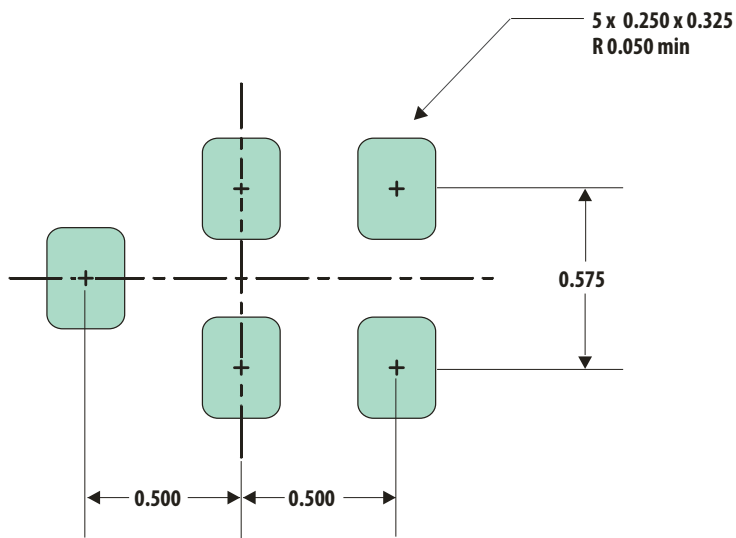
Recommended Solder Stencil (Dimensions in mm)
